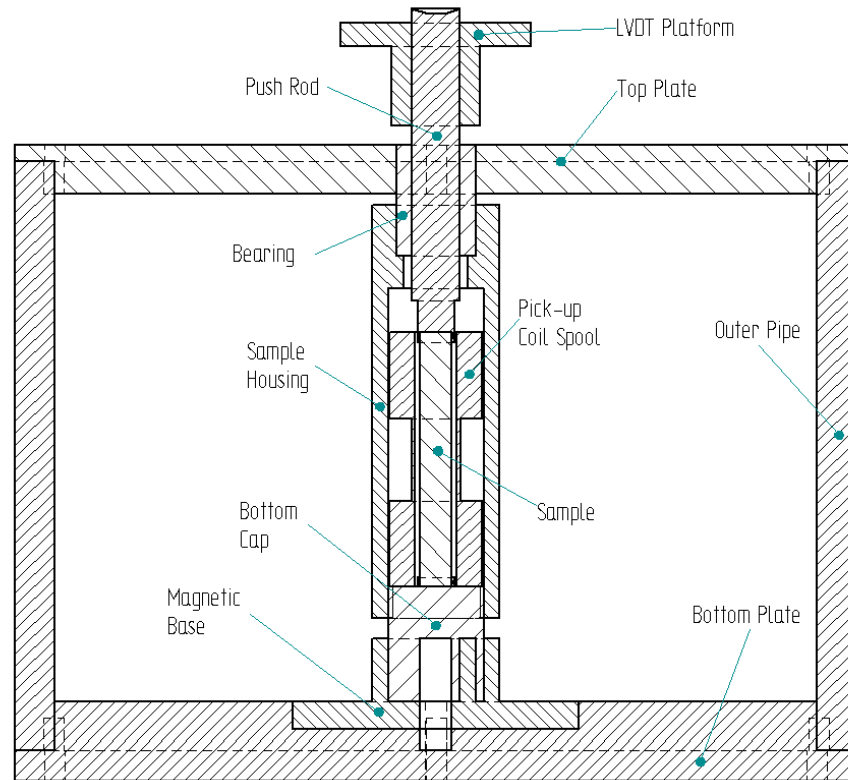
Cross-section of transducer assembly showing all relevant parts.
